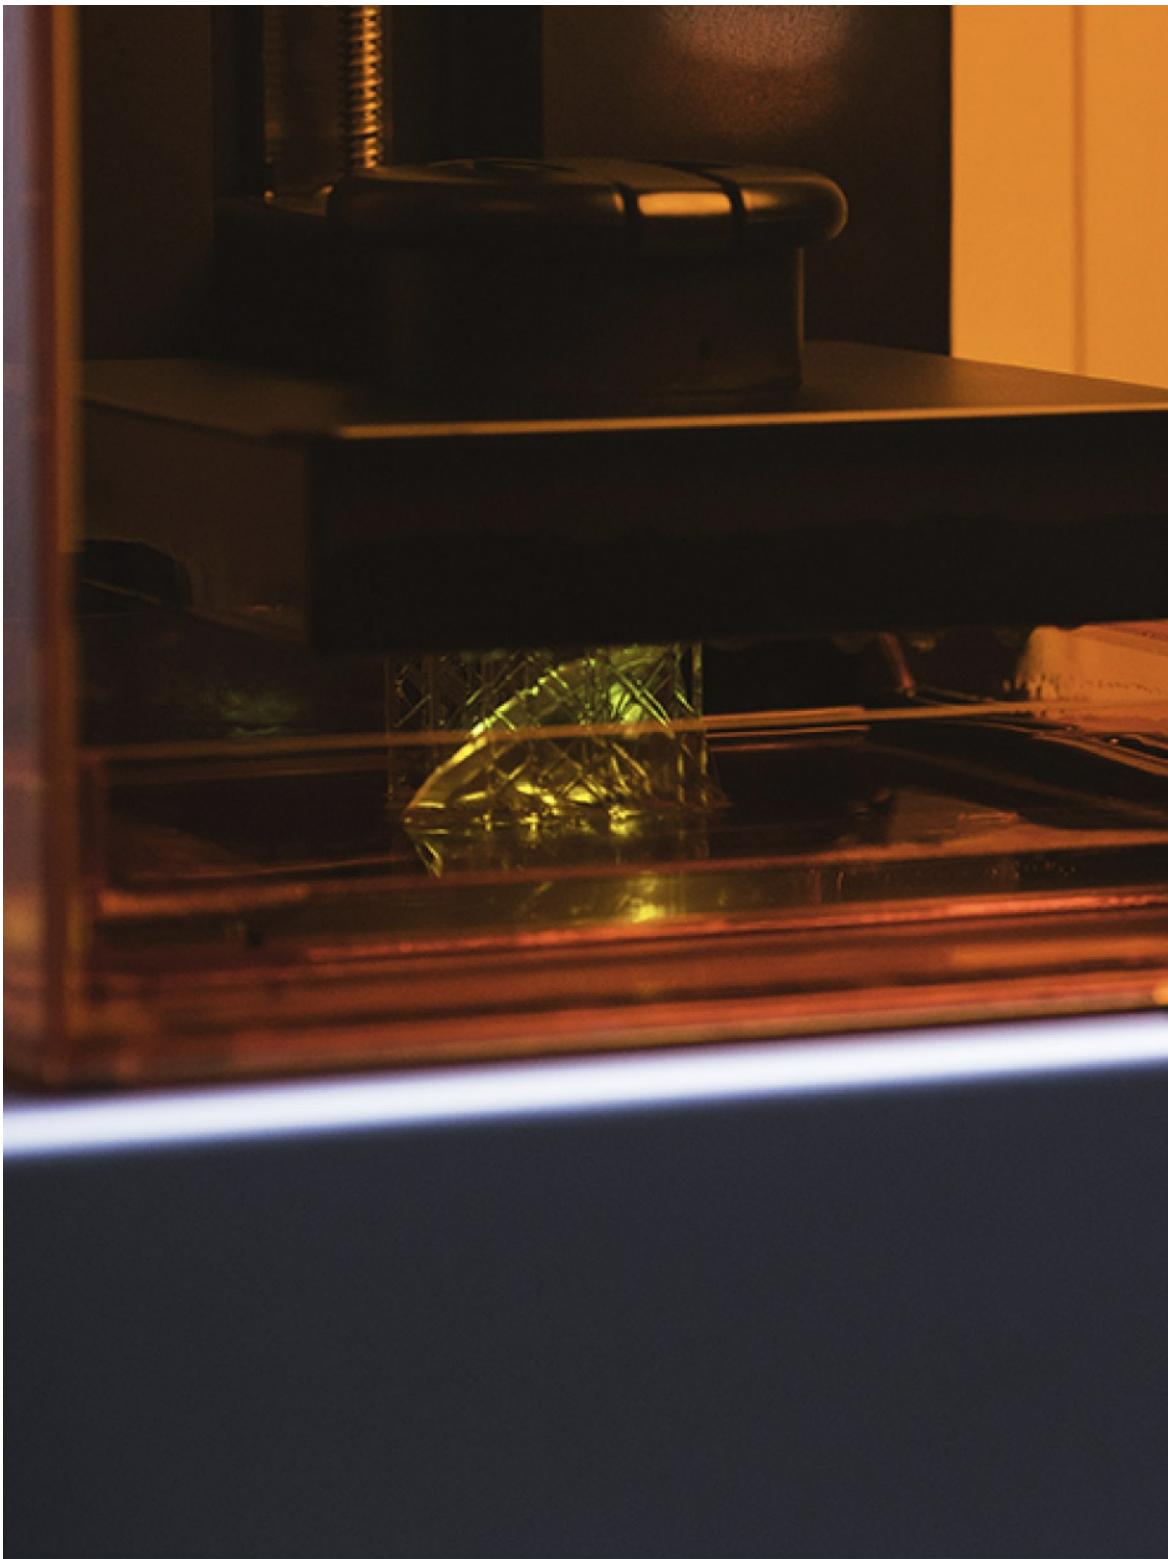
An impeller being printed on bottom-up desktop Formlabs Form 2 printer. The light of the laser is clearly visible on the part
